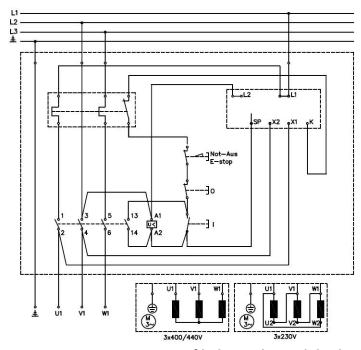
Diagram of belt grinder with brake and no exhaustmotor.
